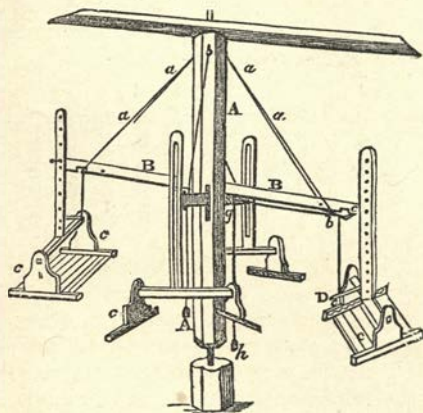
Edinburgh Wheel for Candle Dipping.
